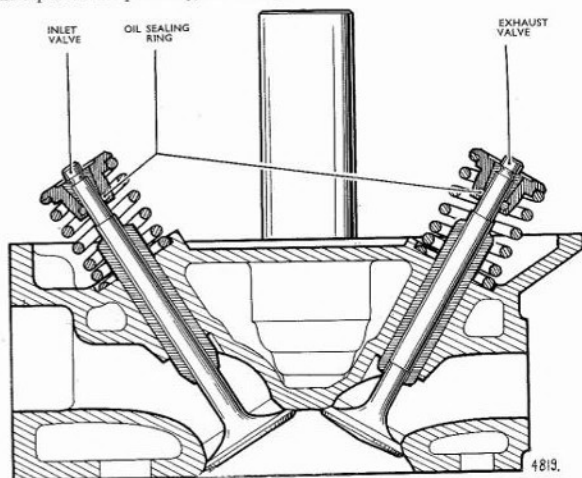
Valve gear arrangement, showing the location of the oil sealing ring in the spring cups
